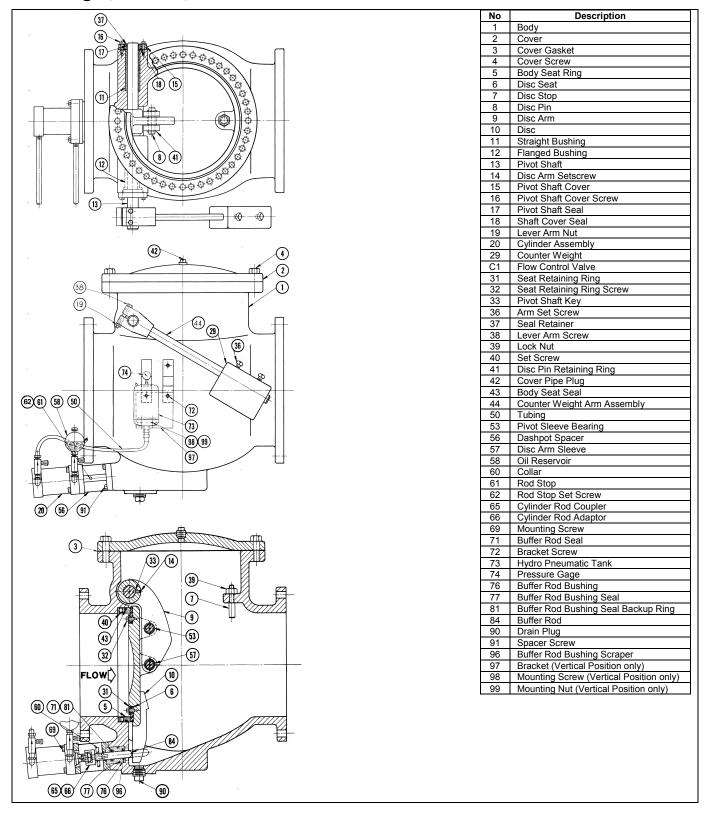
CVS-6000B Swing Check Valve (with Oil Control Bottom Buffer)
